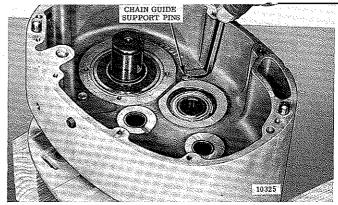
Removing Chain Guide Support Pins Using Pry Bar.
